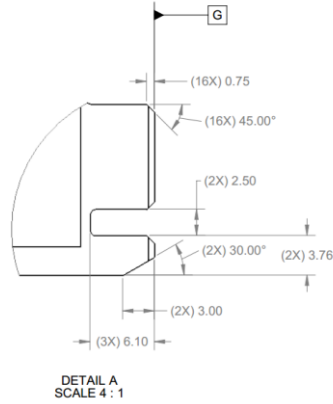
Large Form Factor Keep Out Zone – Bottom View
